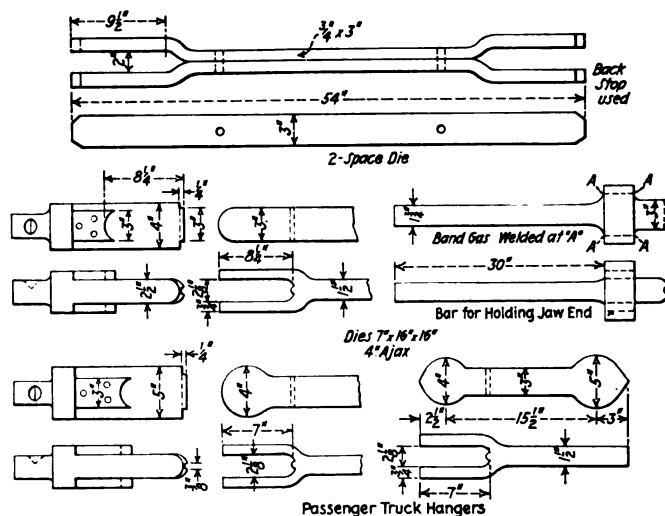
Sketch showing dies and formers for making spring hangers for passenger cars
